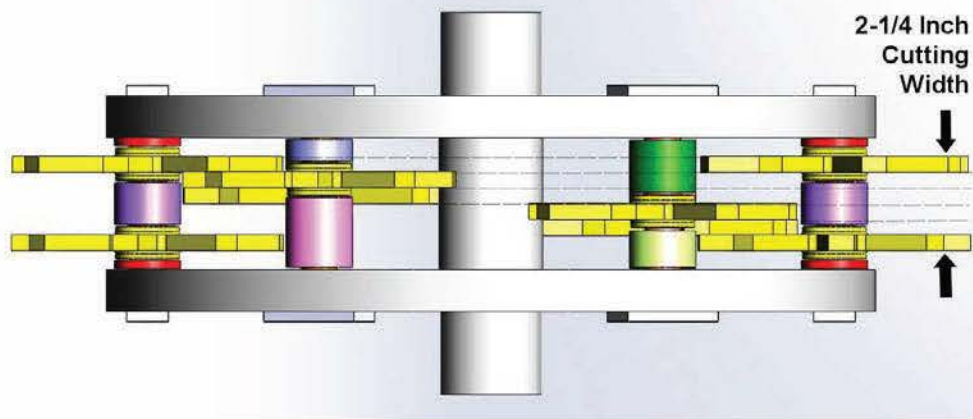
Router Attachment Flywheel Cutter Assembly
